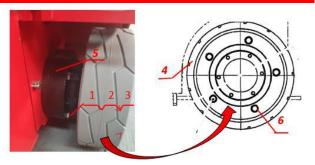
Rear Wheel (S1932 II, S1932E II) 1. Bolt 2. Washer 3. Nut 4. Tire assembly (323×100)
